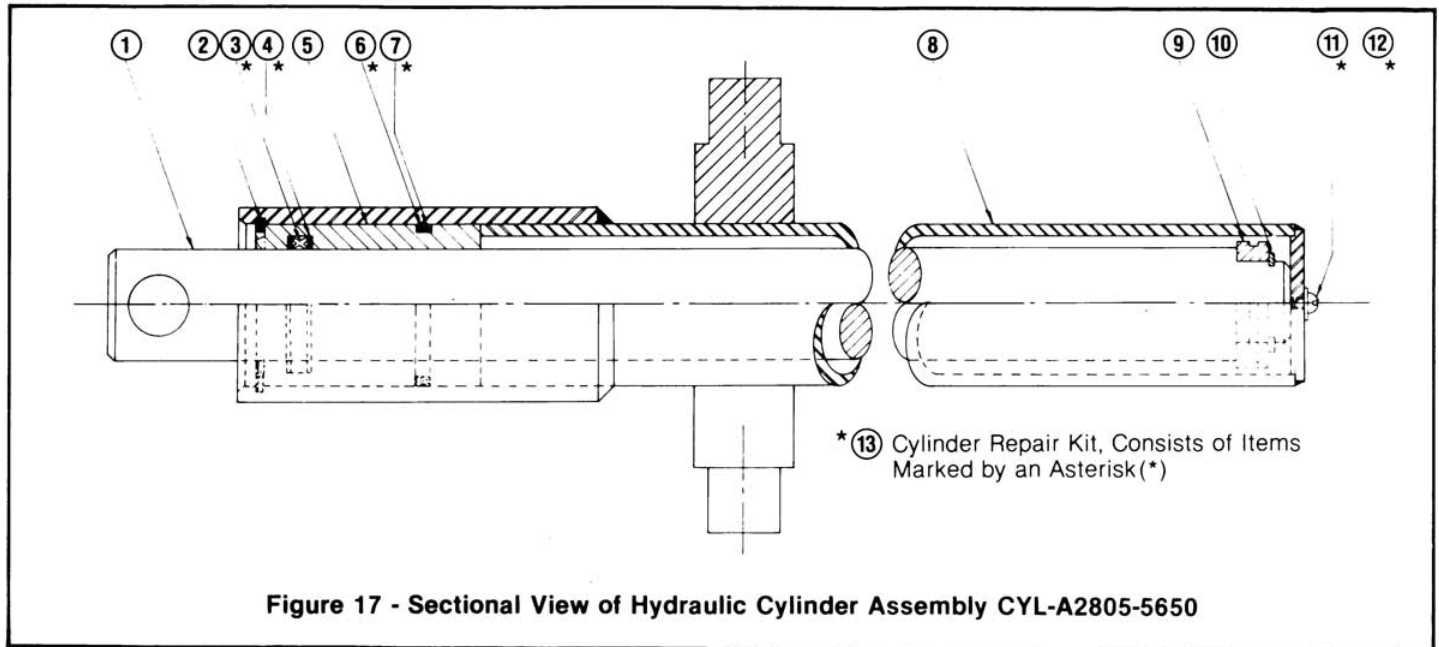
Sectional View of Hydraulic Cylinder Assembly CYL-A2805-5650
